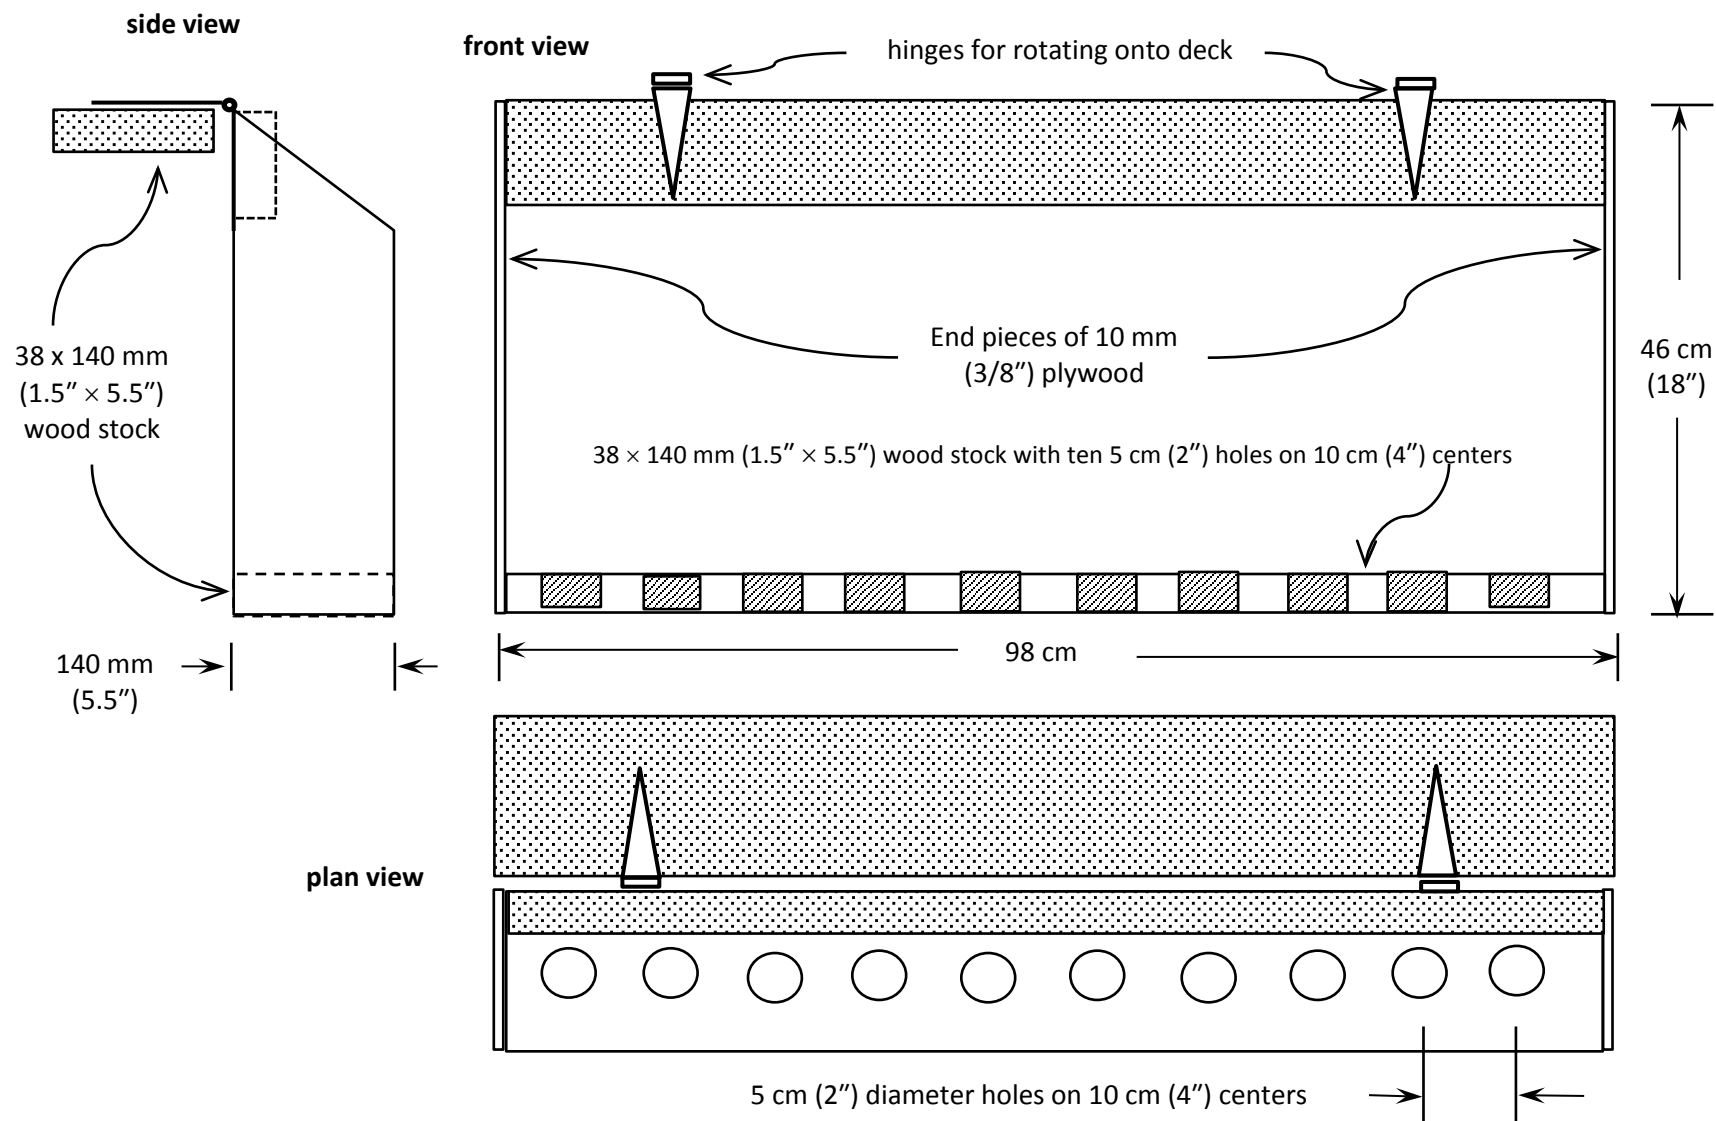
Hinged sample, holding frame for attachment to deck of floating frazil platform (drawing not to scale).
